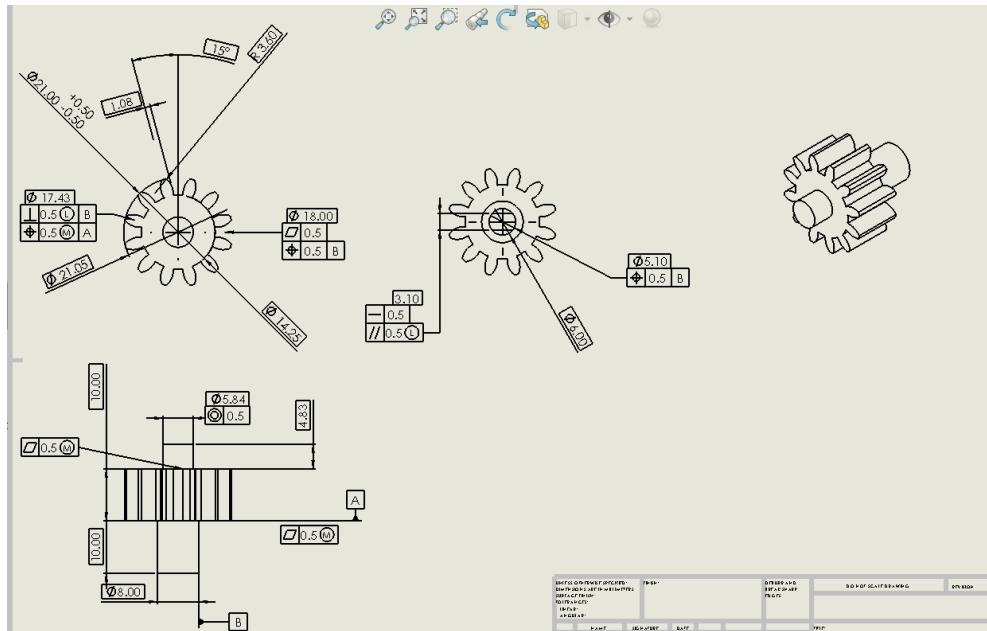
Engineering Drawing of the SCARA rack and pinion gear
